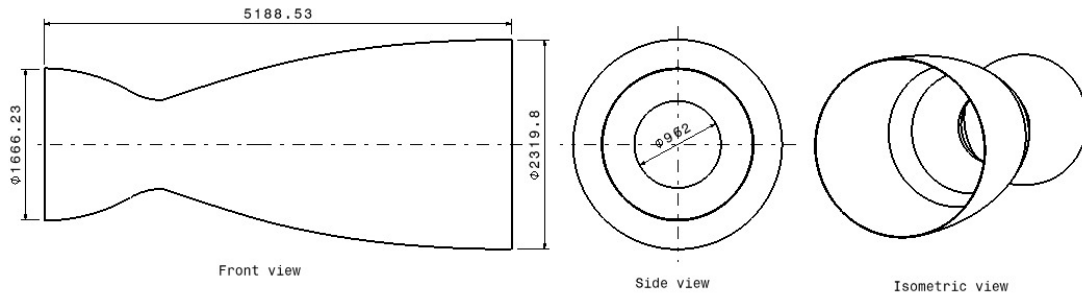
2D Drawing of Designed Nozzle with Different Perspectives
